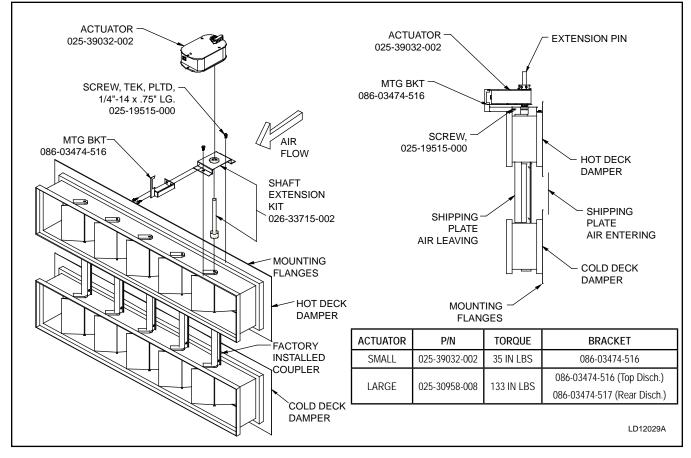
MZ DAMPER/ACTUATOR ASSEMBLY
